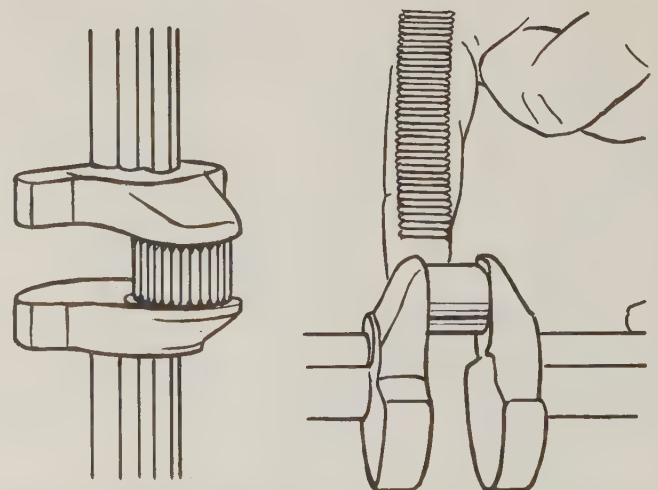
(Left) Needles in place around the crankpin. (Right) Hold needles on finger to apply them to the crankpin. (Lawn Boy Division of Outboard Marine Corporation)
